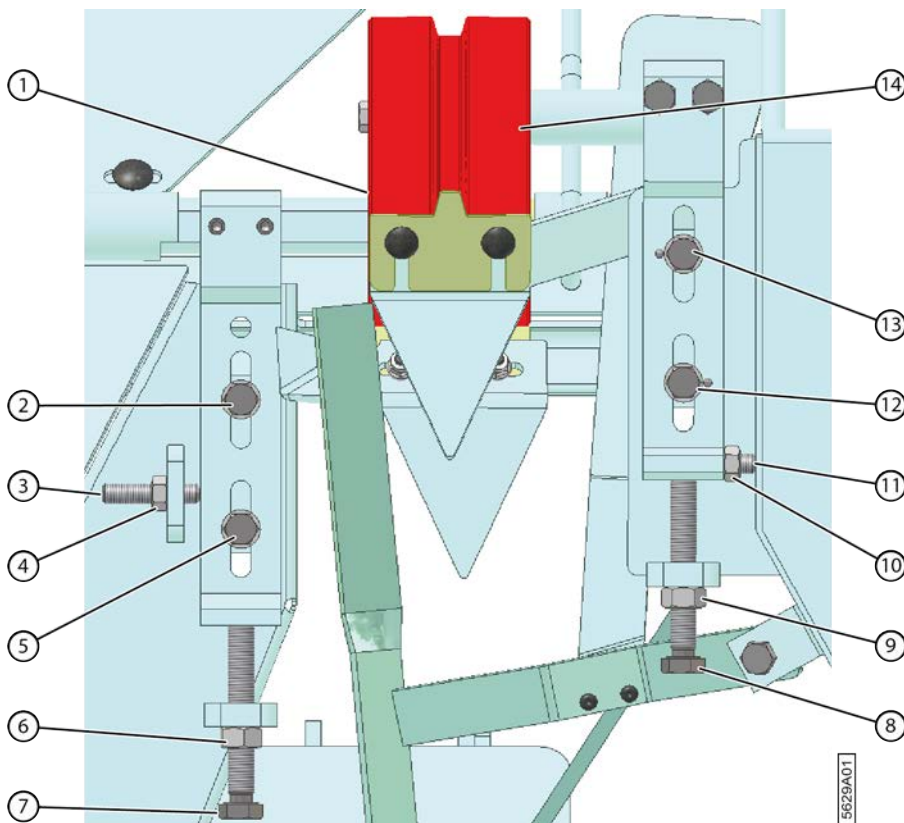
Adjusting tension of the uppermost outermost picking belt
